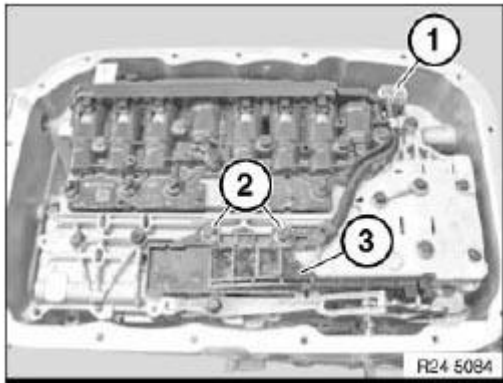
Identifying Transmission Position Switch, Plug And Screws
